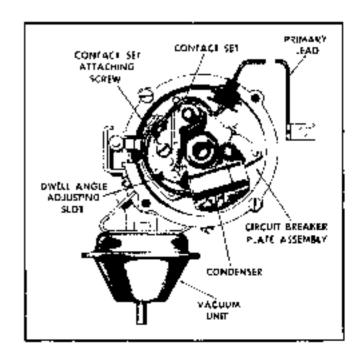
Top View of Distributor (Cap and Rotar Removed)
